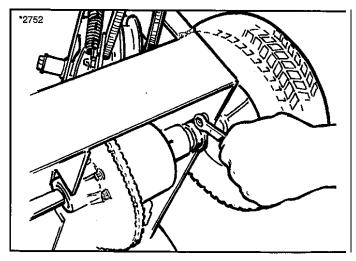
Loosen Hex Nut To Adjust Tension On Right Axle Mounting Bracket
